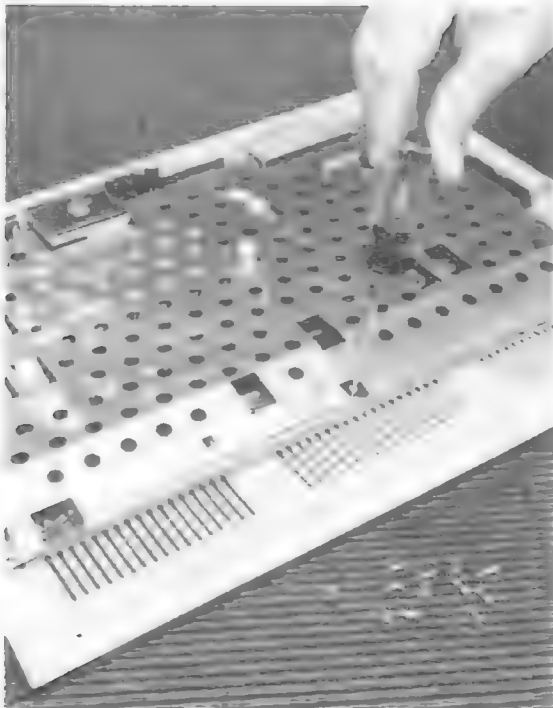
Seven more Torx screws secure the printboard-shield assembly to the bottom of the case.
